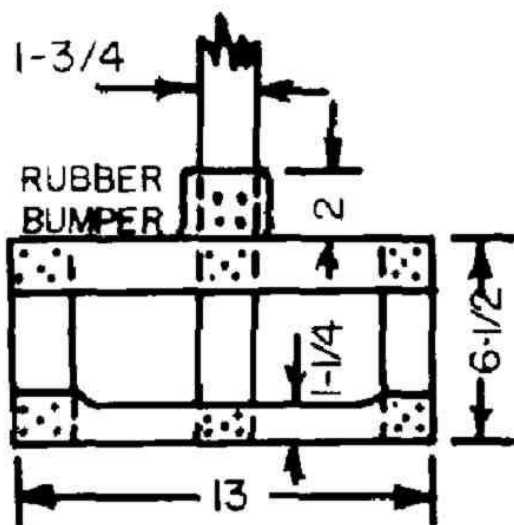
Piston Rod Handle Made of  $\frac{3}{4} \times 1\frac{3}{4}$ -inch boards.
